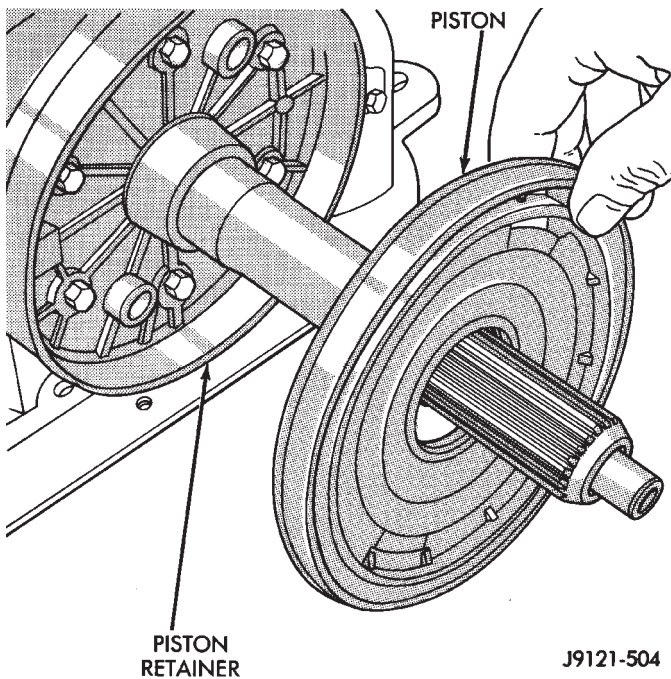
Removing/Installing Overdrive Piston Thrust Bearing
